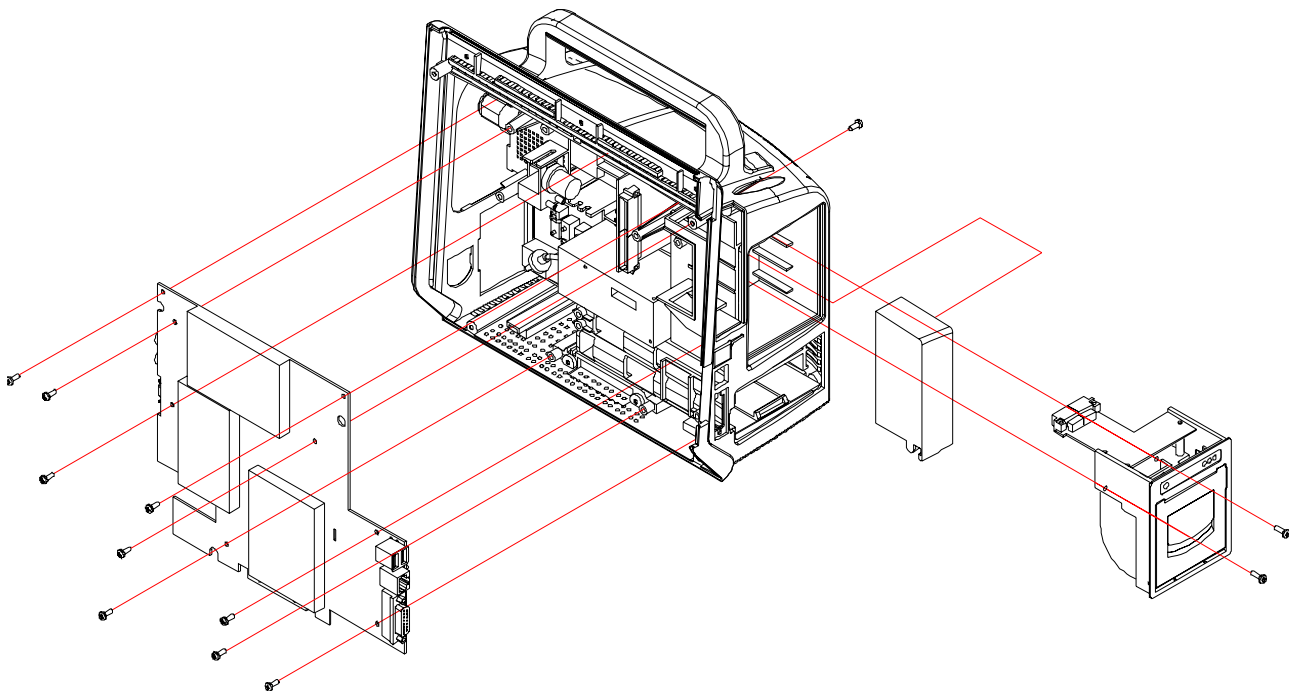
Rear Case Disassembly – TRX-02 Module Option Cover, Recorder, Main Board
